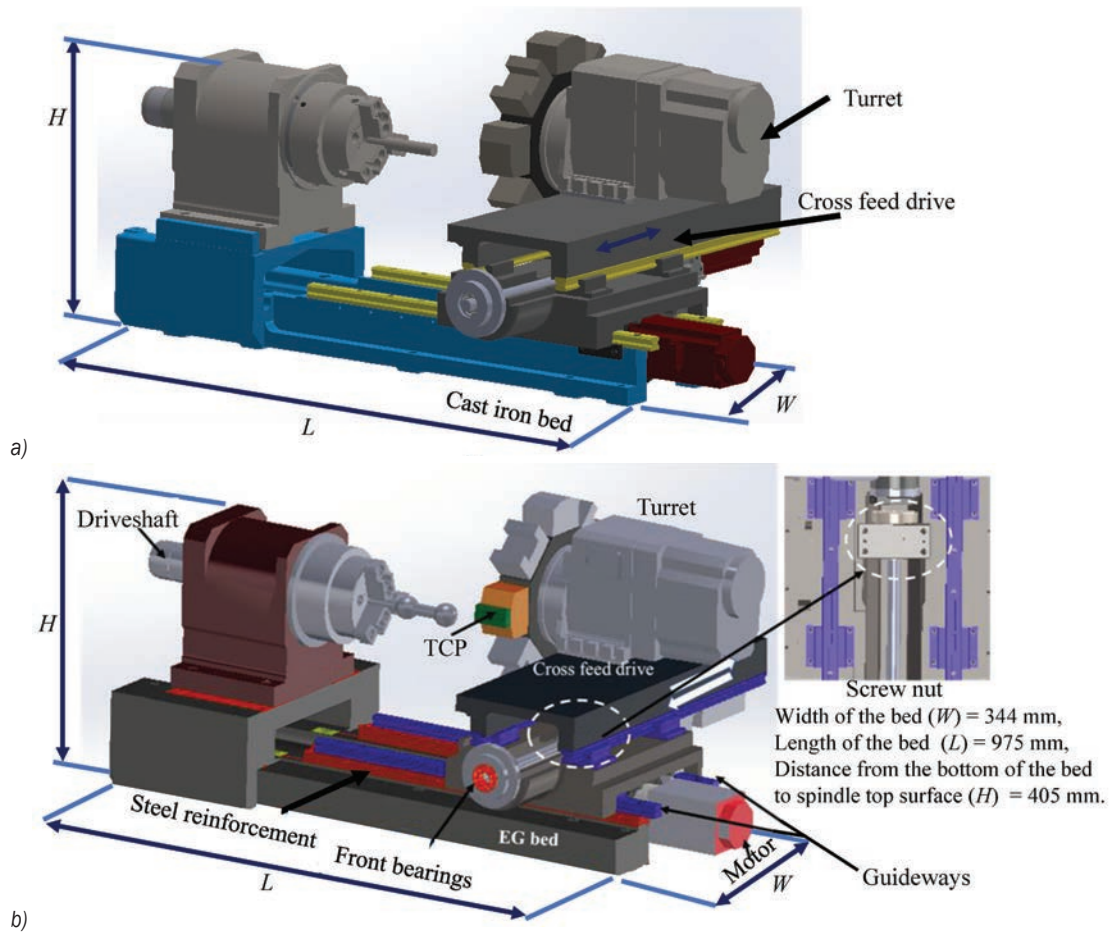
a) CNC lathe with CI bed, and b) CNC lathe with SREG bed
